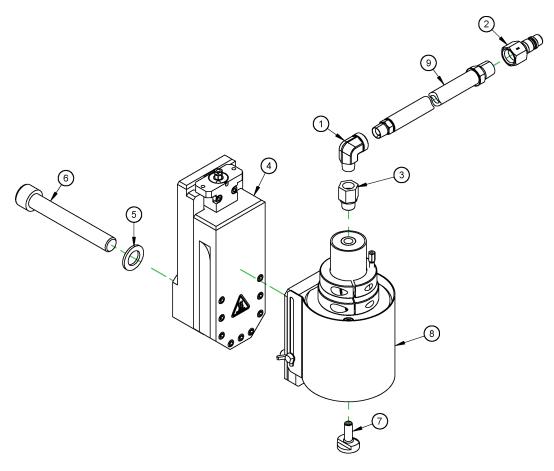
MACHINING ARM ASSEMBLY (P/N 57872)
